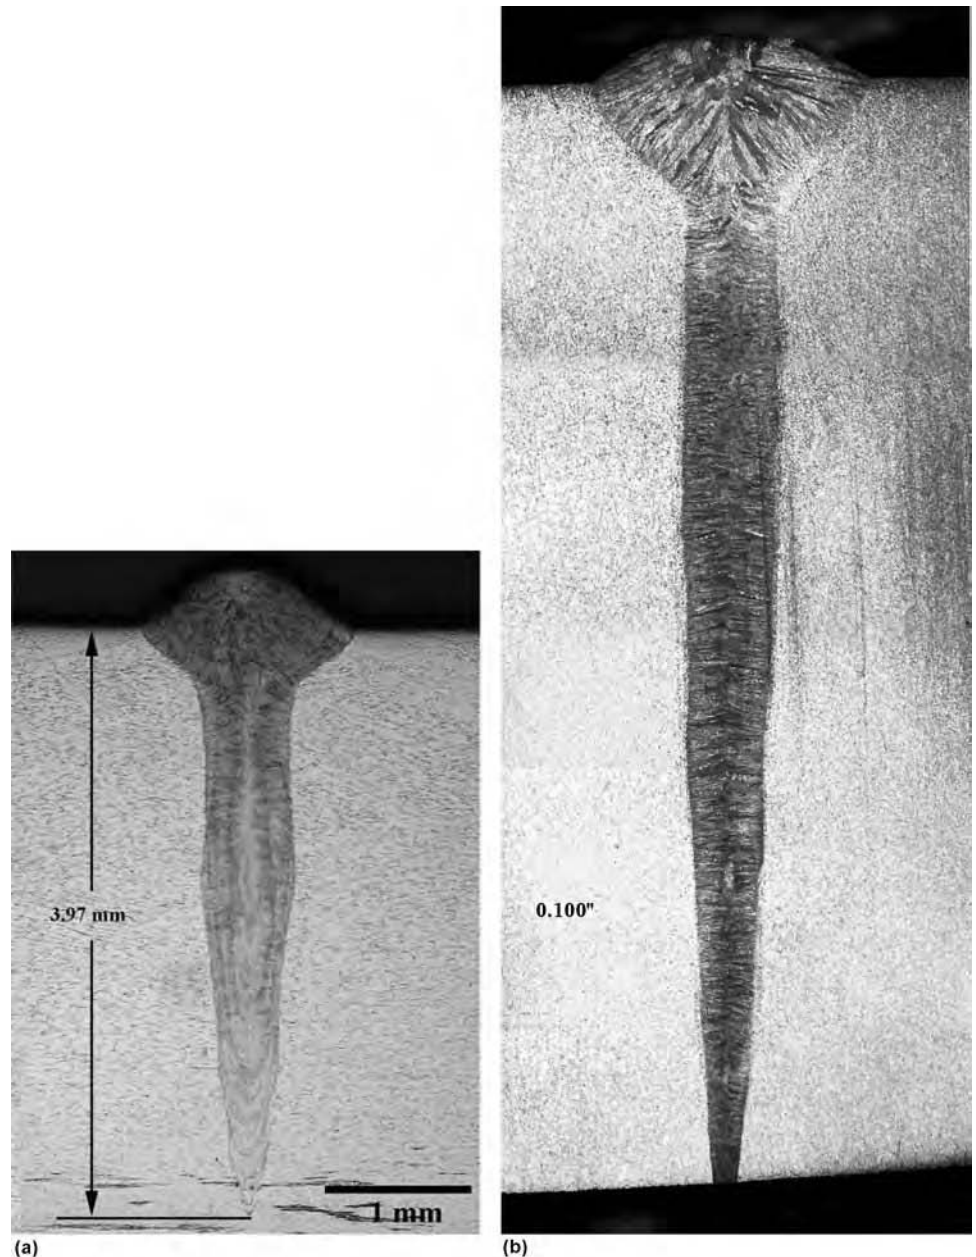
Cross sections of electron beam welding using high-voltage welding equipment. (a) Shallow-penetration weld on 304L stainless steel with weld parameters of 100 kV, 10 mA, and a travel speed of 17 mm/s (0.7 in./s). Courtesy of T.A. Palmer, Applied Research Laboratory of Pennsylvania State University, State College, PA. (b) Deeper-penetration weld on superalloy 718 with weld parameters of 120 kV, 83 mA, and a travel speed of 8.5 mm/s (0.3 in./s). Courtesy of G. LaFlamme, PTR-Precision Technologies, Enfield, CT
